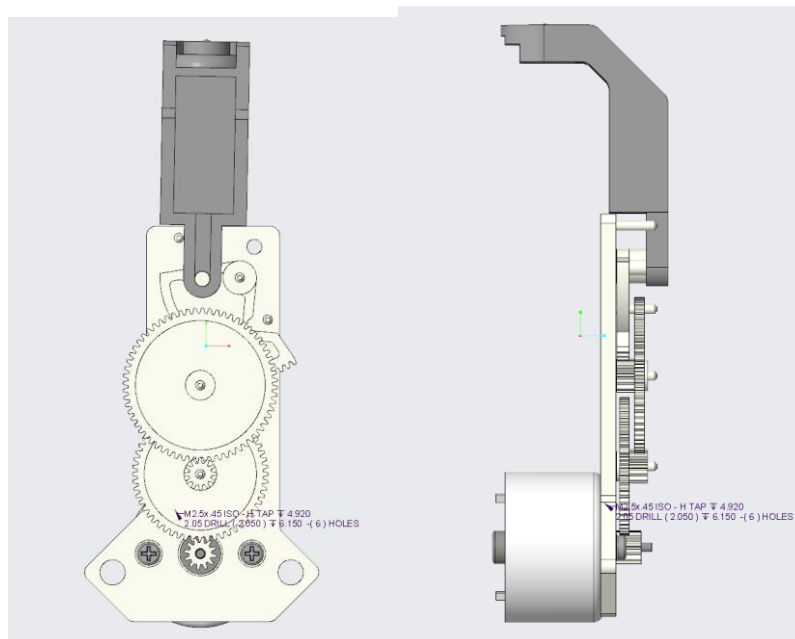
image showing model design of gear mechanism from the front and side profile.
